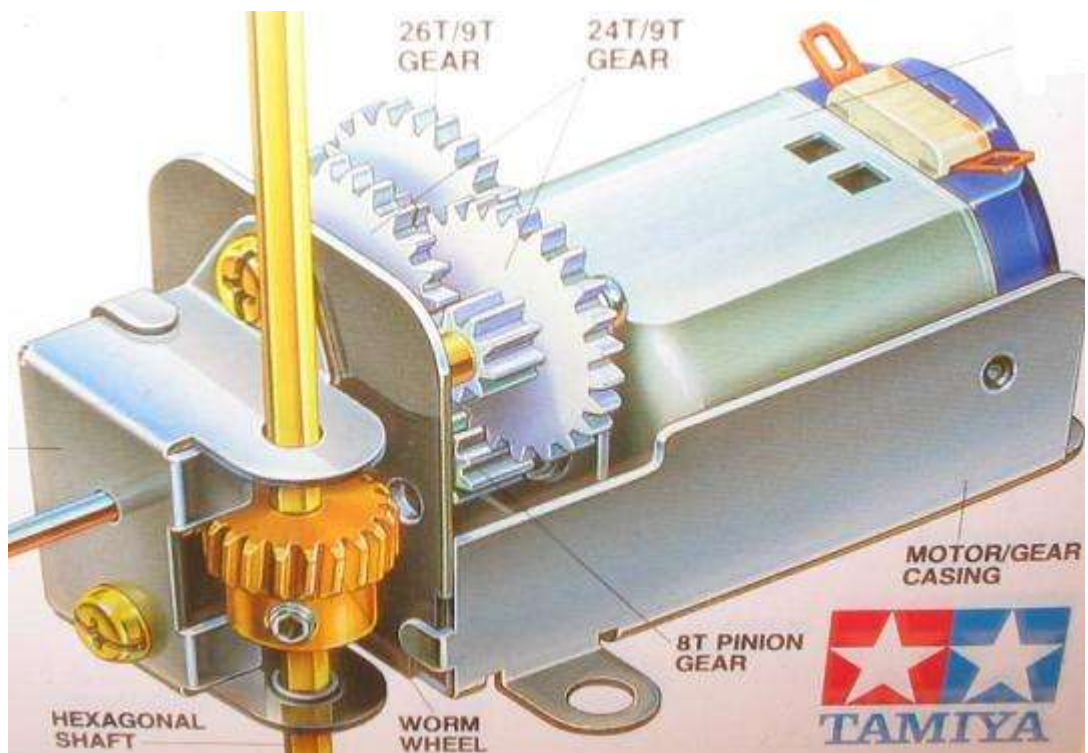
Tamiya Universal Gearbox (Tamiya, Inc.)
